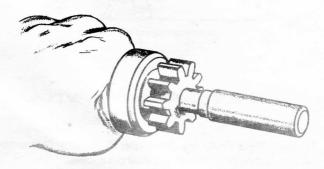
TOOL FOR DRIVING PINION STOPPER
